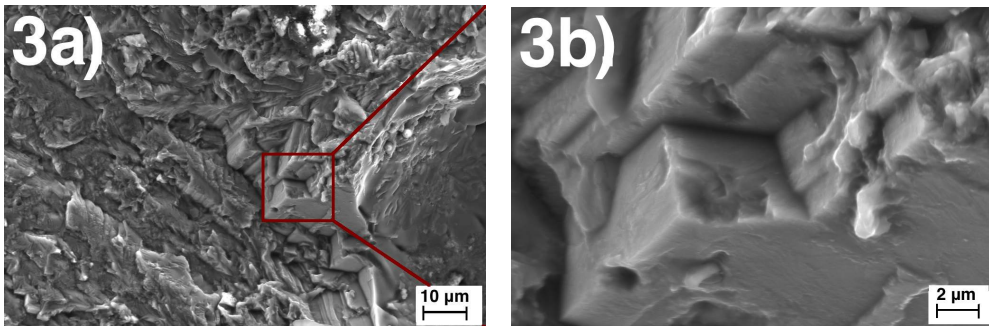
Intergranular crack propagation on the fractured surface of as welded AA6082.52-T6.
